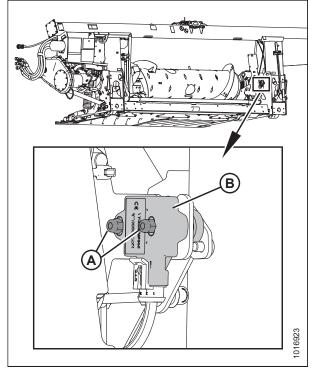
Optional Two-Sensor Kit - Right Sensor
